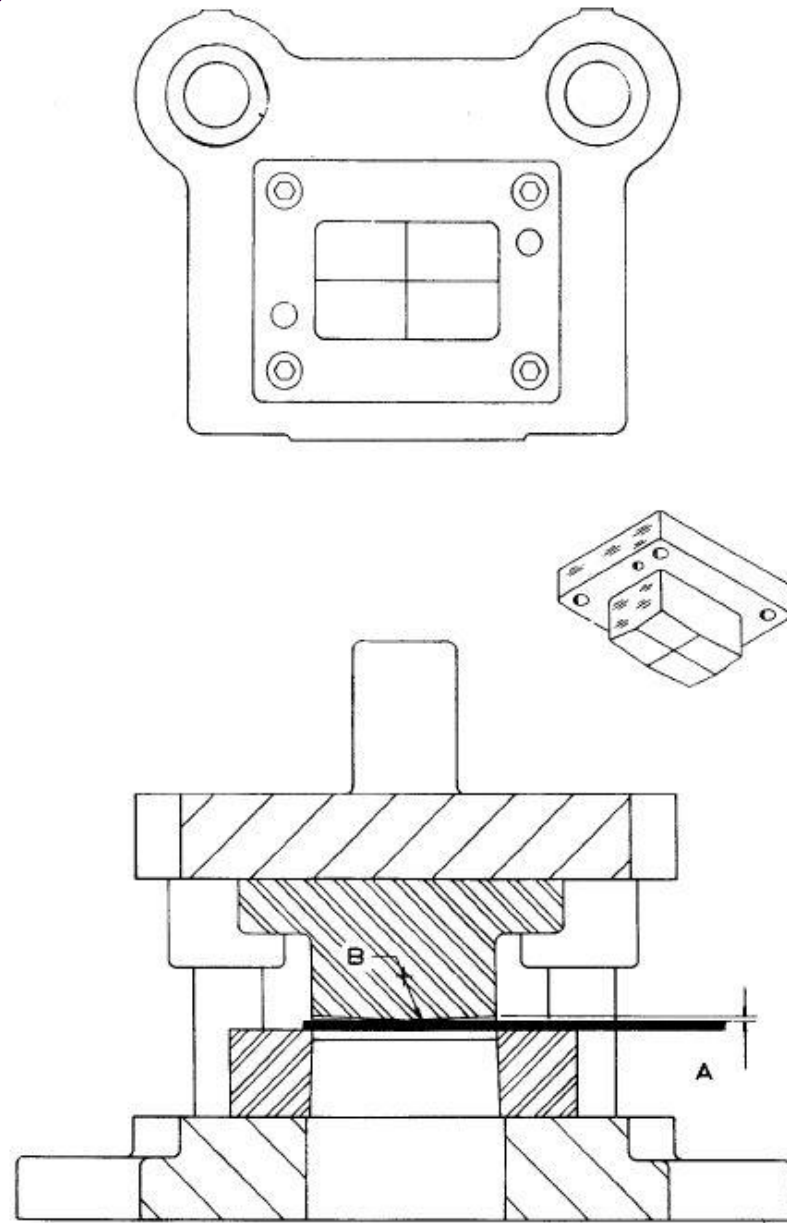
A punch configuration for applying shear in cutting large openings.
